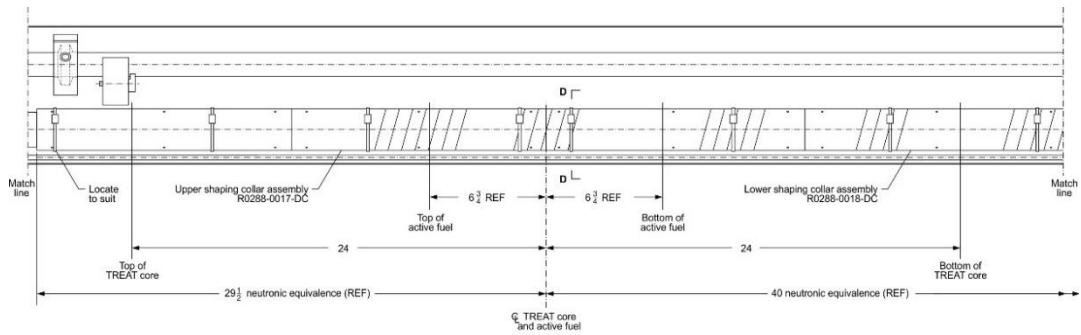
M2/M3CAL Assembly (Middle) (DWG# R0288-0004) [1].
